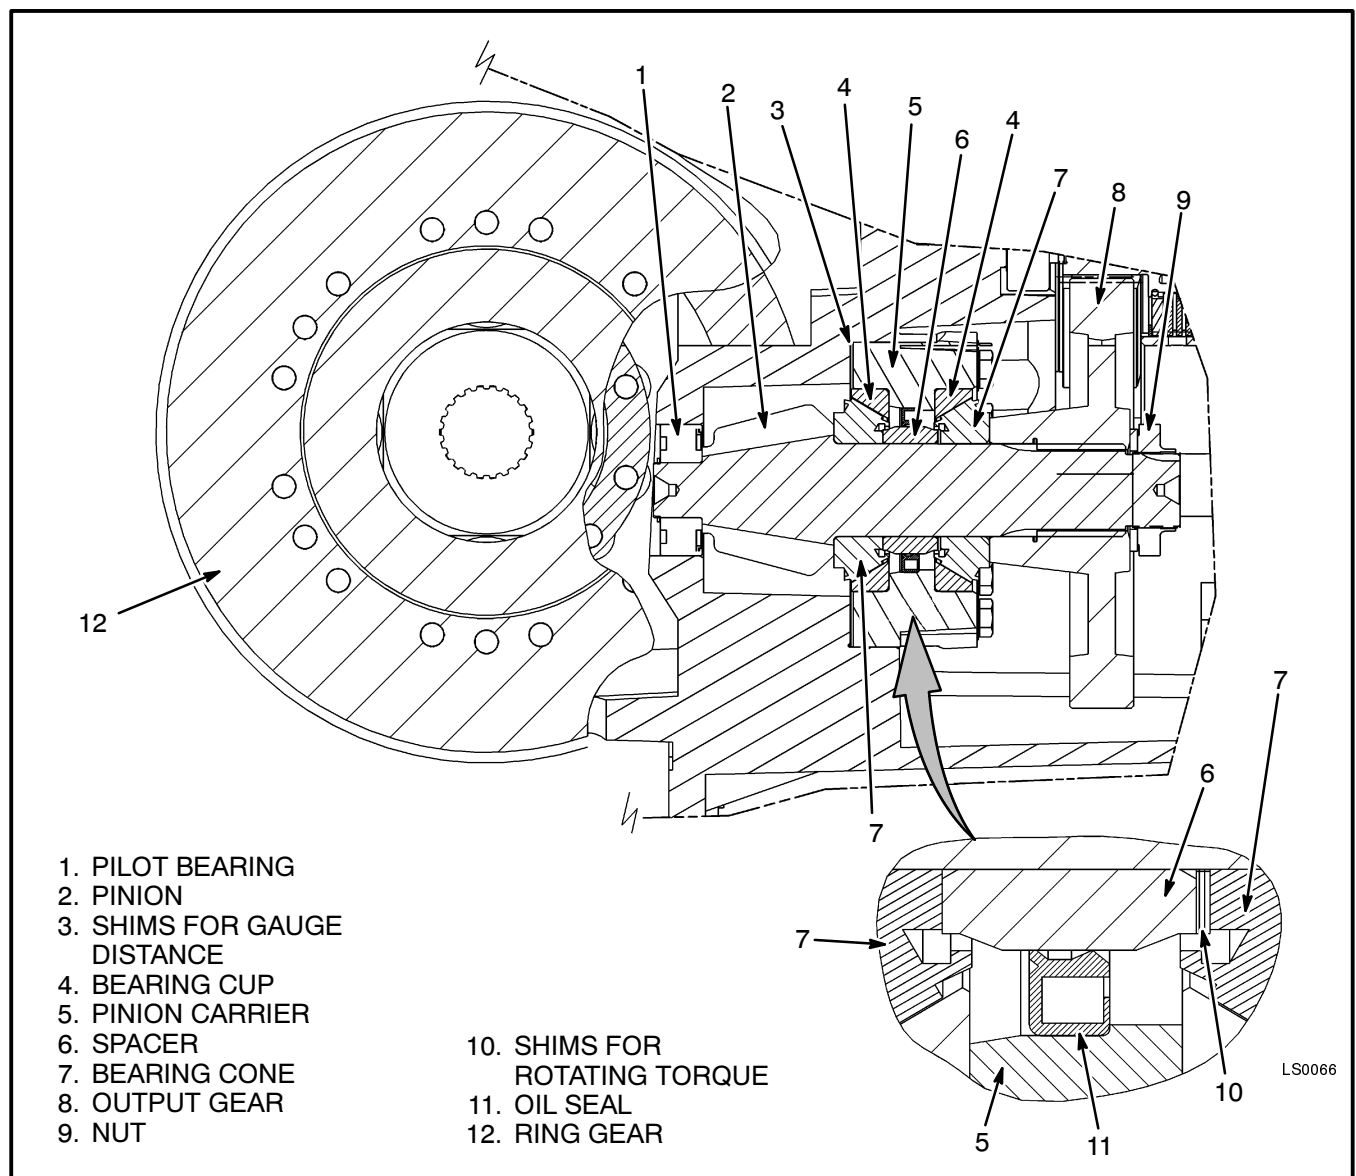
RING GEAR AND PINION ARRANGEMENT
